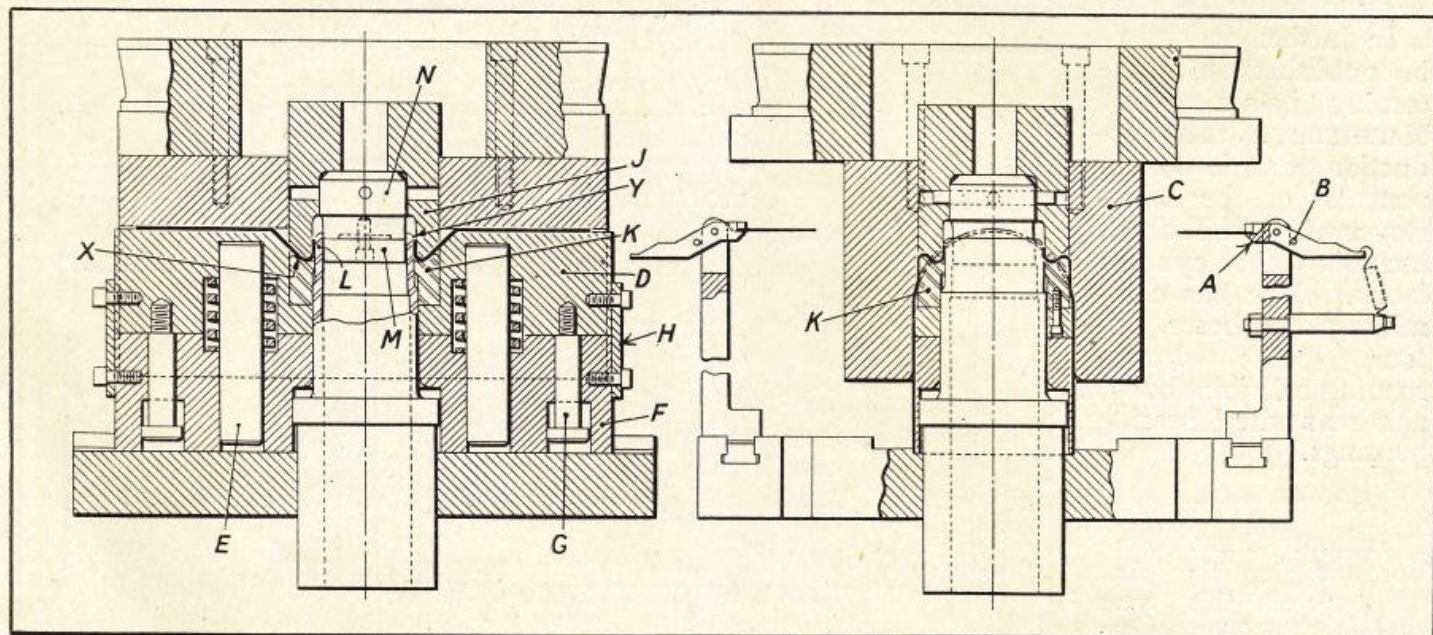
Sectional Views through the Centre of the Tool for Forming, Drawing, Piercing and Plunging the Air Cleaner Shell
